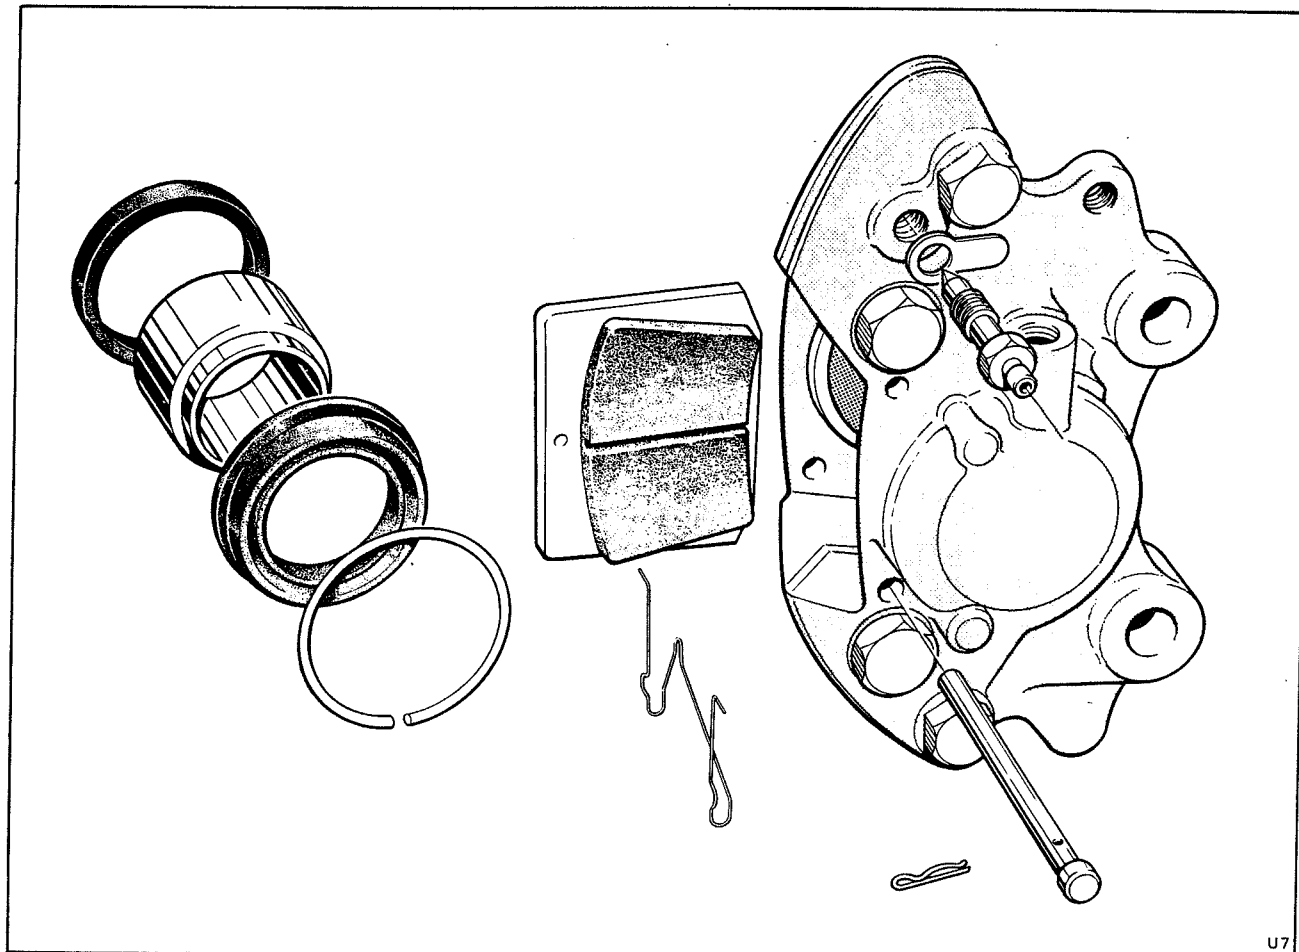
Front wheel brake caliper (left-hand rear shown)
